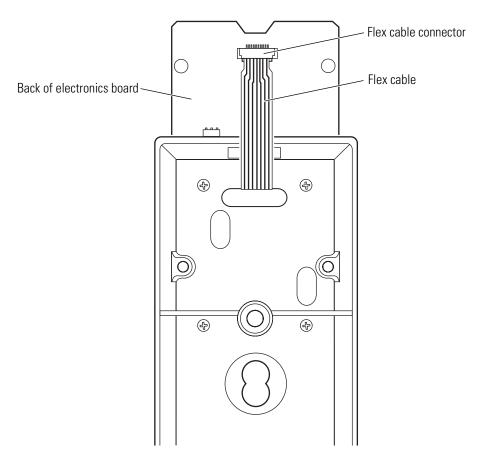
Disconnecting the flex cable from the B.A.S.I.S. smart card control electronics board
